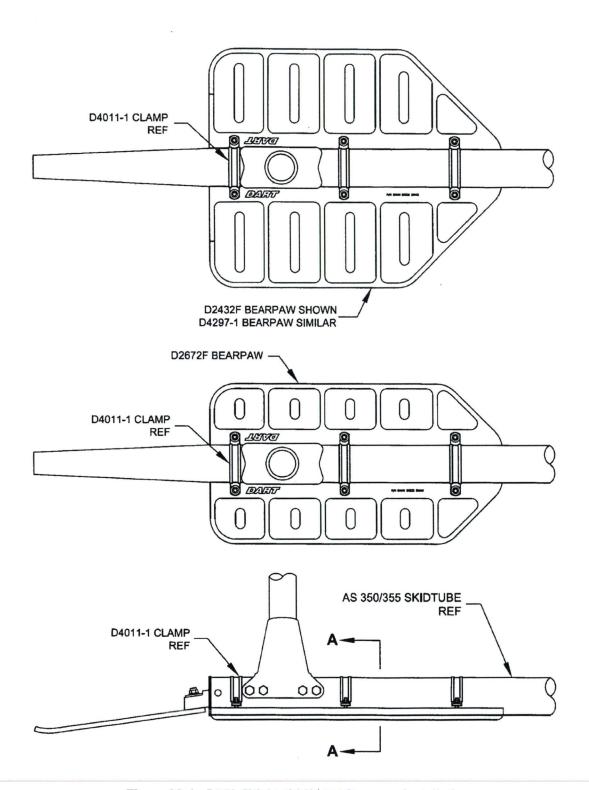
D350-578-011/-013/-021 Bearpaw Installation
